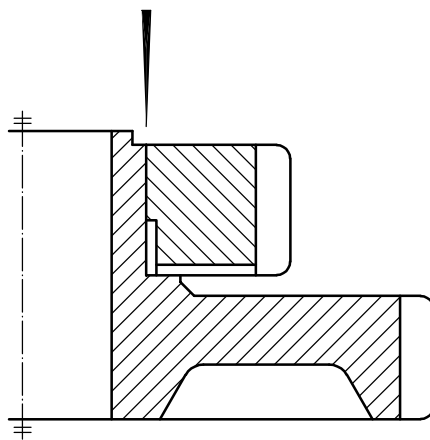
Example of a gear wheel with an unsuitably located axial joint
